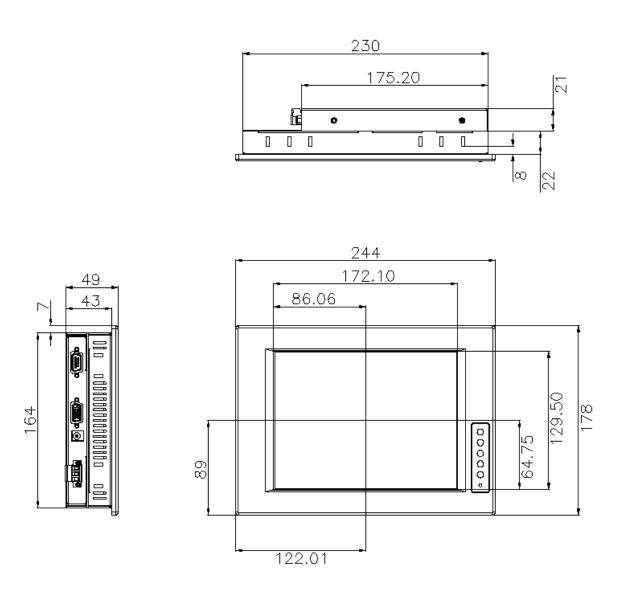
MPE 08 Physical Dimensions (millimeters)
